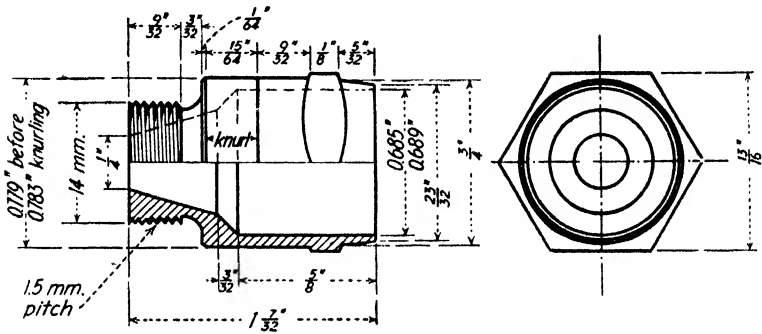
Spark-plug shell produced in steel on a screw machine. This part could be die cast in zinc alloy at lower cost but would not have the strength of steel.
